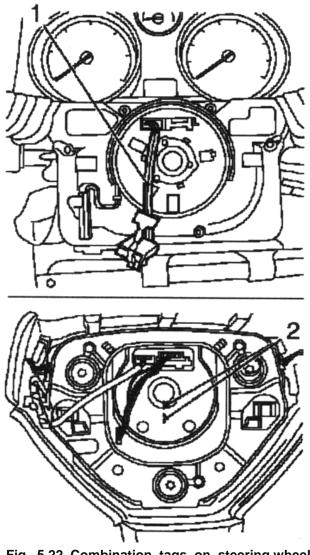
Combination tags on steering wheel and steering shaft:
